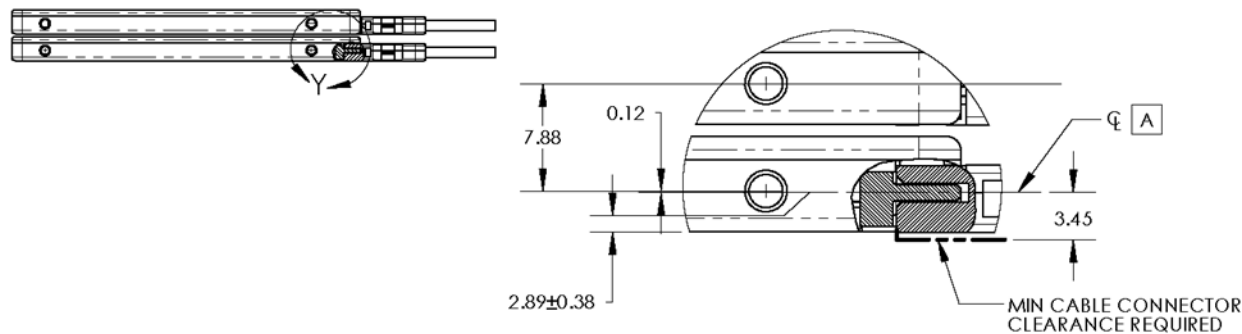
CABLE RETENTION: CABLE RELEASE CLEARANCE SIDE VIEW
